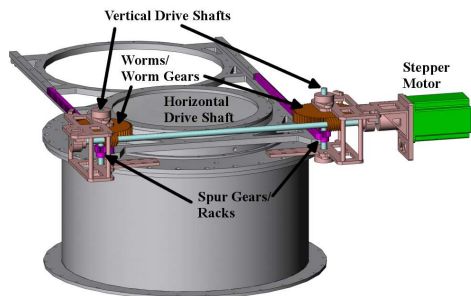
The DWM drive mechanism consisted of a stepper motor (green) driving a horizontal shaft drive shafts (cyan) with two worm/worm gears (brown), coupling to two vertical shafts (cyan) with two spur gear/racks (magenta).
